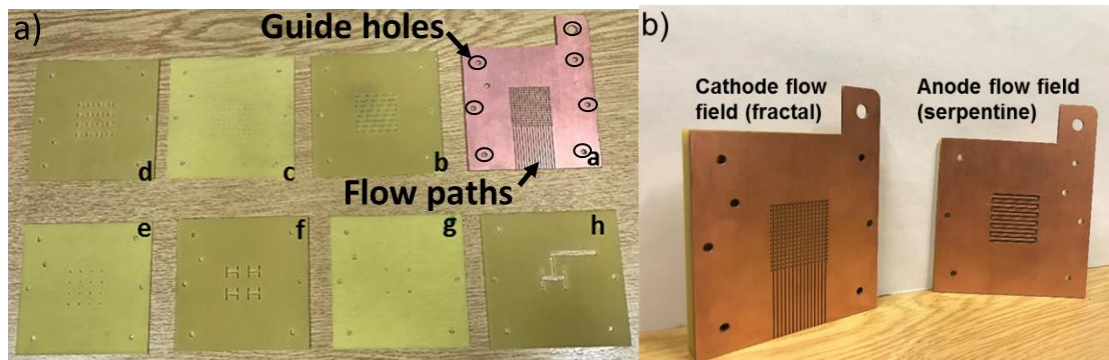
(a) Fabricated PCB plates with plate "a" Cu coated; (b) PCB plates assembled into a flow field with the first plate Au coated; this plate is also the current collecting plate. Cathode fractal flow-field plate dimensions – 80 mm x 80 mm x 9.6 mm (120 g in weight and a manufacturing cost of £30 per plate) and anode flow-field plate dimensions – 80 mm x 80 mm x 3.5 mm.
